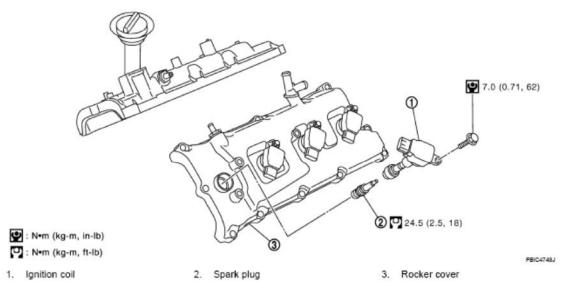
Identifying Ignition Coil Components With Torque Specifications
